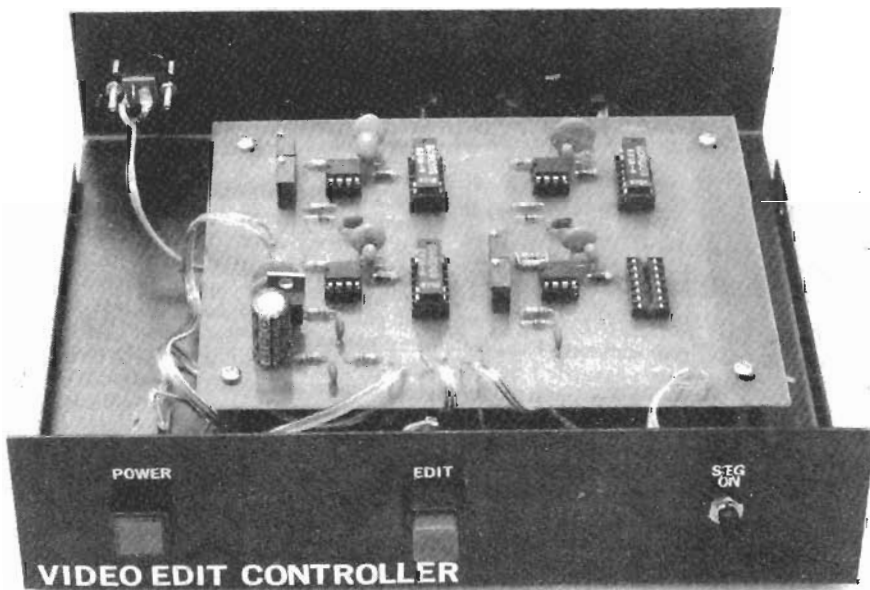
THE PRINTED-CIRCUIT BOARD is mounted in the cabinet using spacers at each mounting screw. Make certain that there is some kind of wire between the PC board's ground trace and the metal cabinet.
